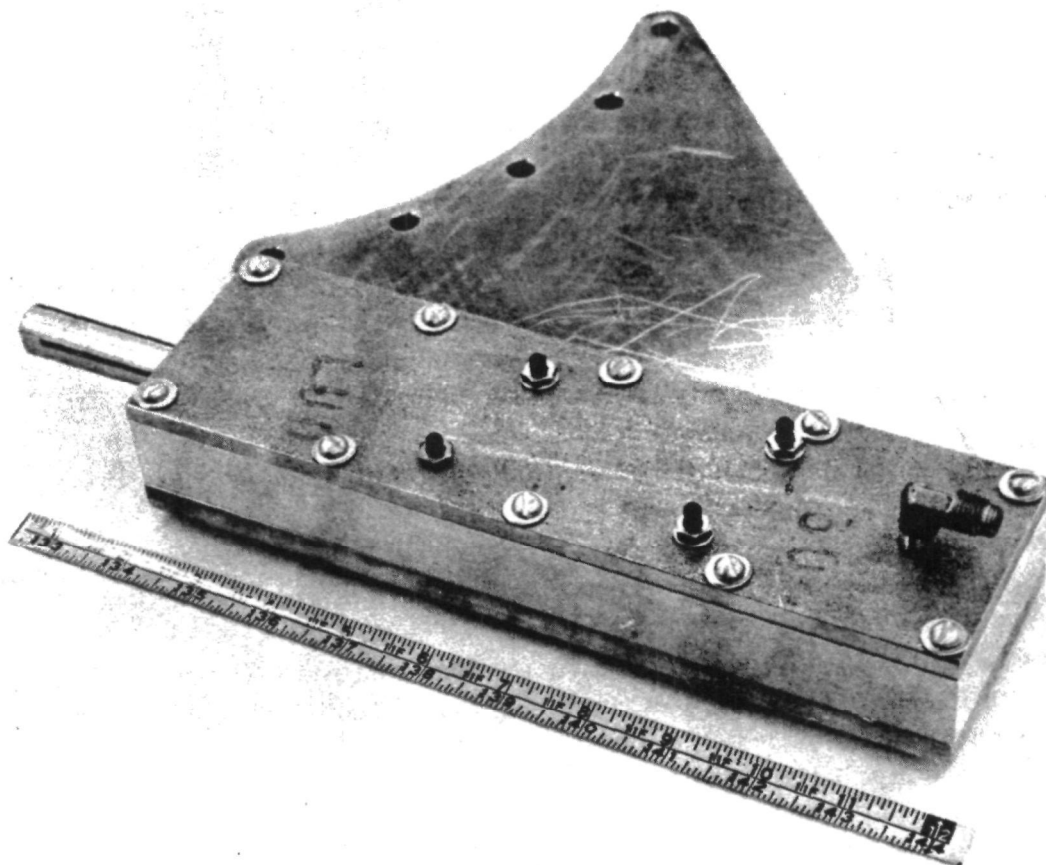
FUEL METERING VALVE ASSEMBLY
